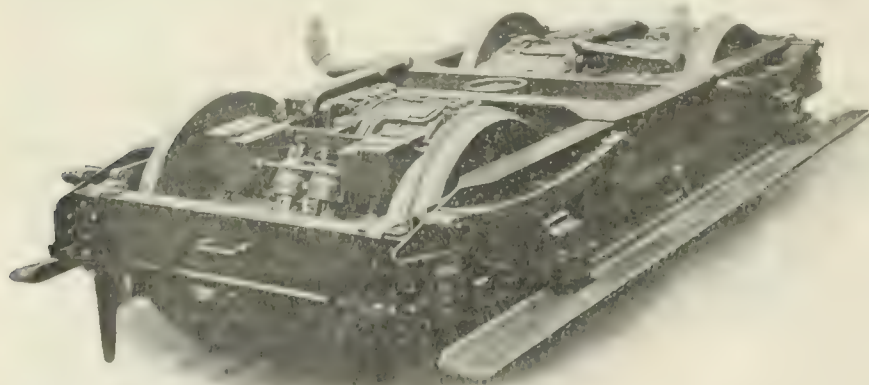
MOTOR BOGIE WITH SIEMENS EQUIPMENT.
